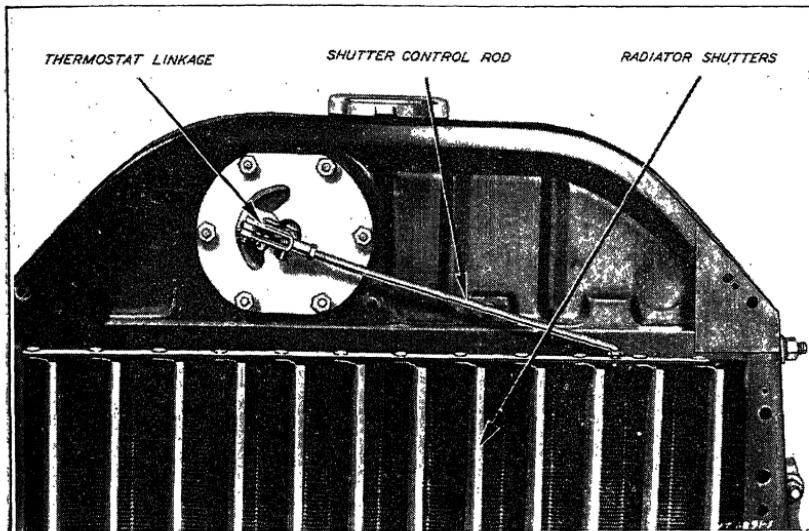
Cadillac Thermostatic Radiator Shutter Control
